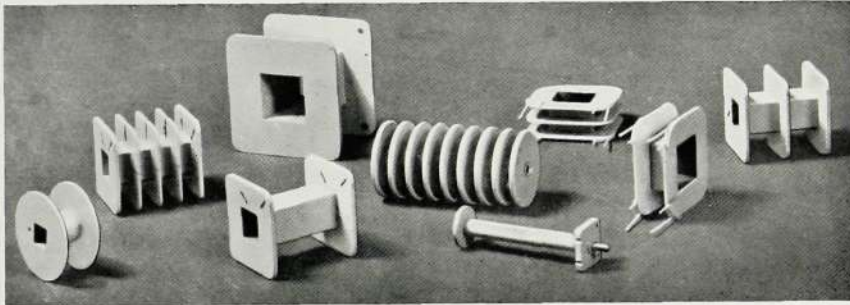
Typical Completely Moulded Plastics Formers used on Tropical Equipment
